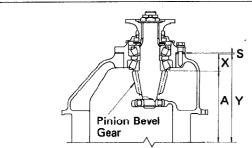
Pinion Bevel Gear Mounting. There are right hand and left hand in pinion bevel and gear vebel. Pay attention.
